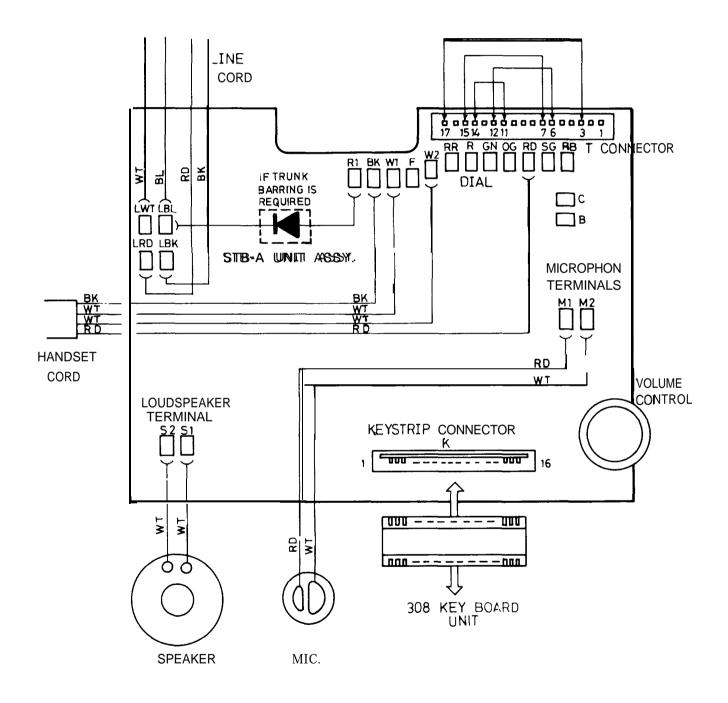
STB-A STATION BOARD ASSEMBLY
